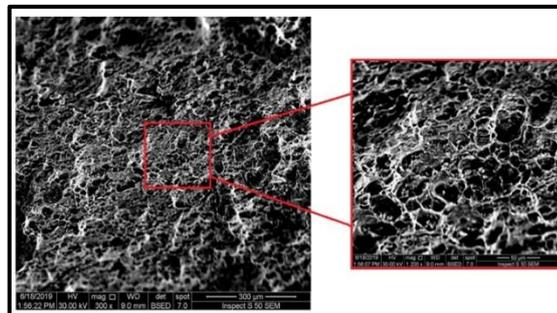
(SEM) image of the welded (AA2024) at the optimum condition (shoulder diameter (14 mm), rotation speed (1400 rpm), linear speed (40 mm/min), tilting angle (3°) and welding direction (3 passes).
